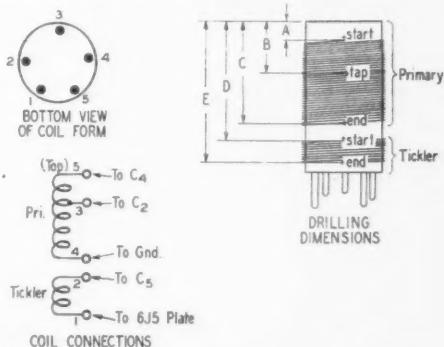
Coil-winding data. The sketches at the left show the arrangement of the windings and the numbers of the pins on the base of the coil form. At the right is a sketch showing the method of determining how far down the coil form a given hole should be drilled. The exact dimensions are listed below.
